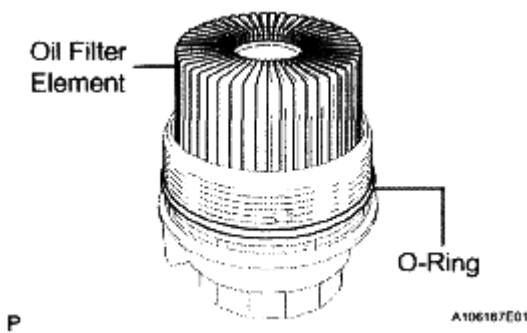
Applying Light Coat Of Engine Oil To O-Ring
